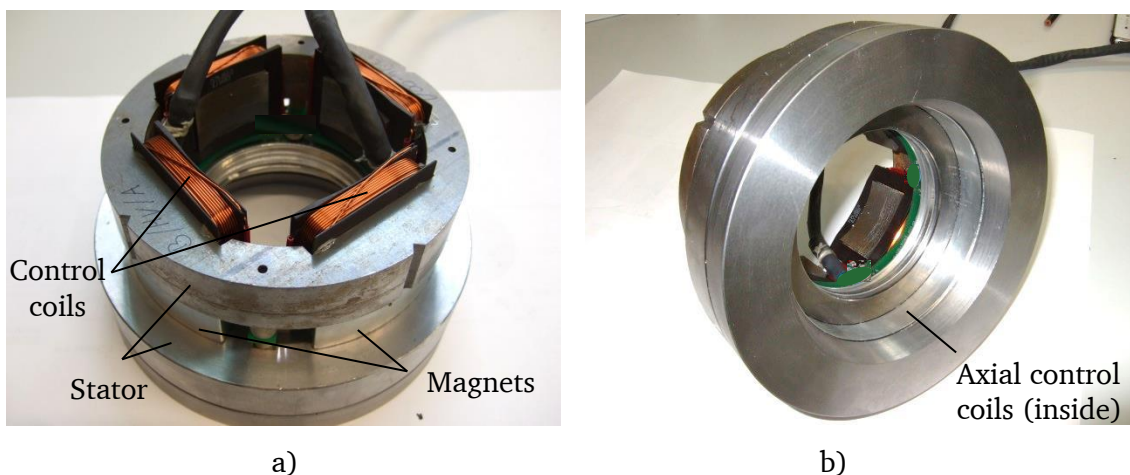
Stator of the combined magnetic bearing: a) top view, b) bottom view
